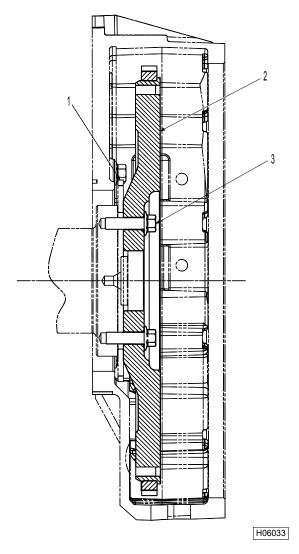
14 inch flywheel - for multiple plate clutch applications, 800 lbf·ft and below
